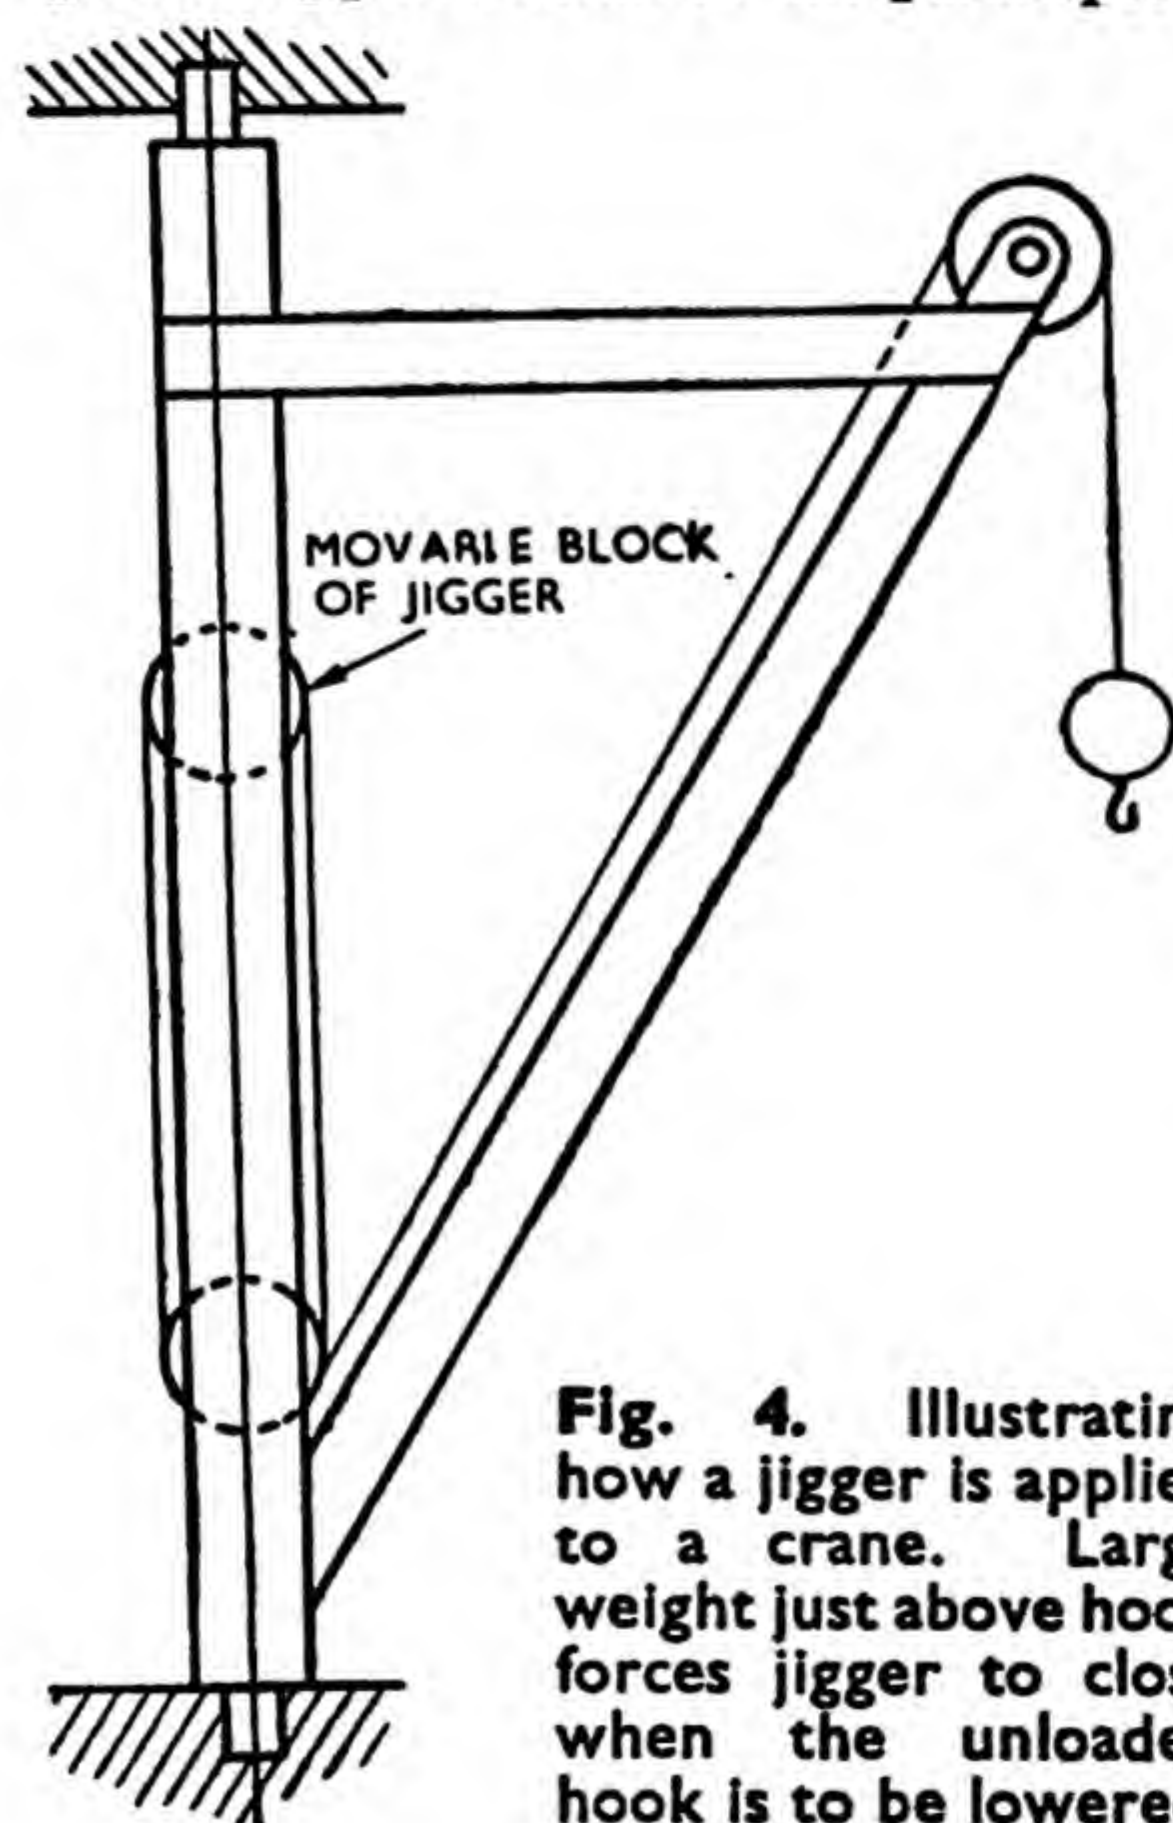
Illustrating how a jigger is applied to a crane. Large weight just above hook forces jigger to close when the unloaded hook is to be lowered.
